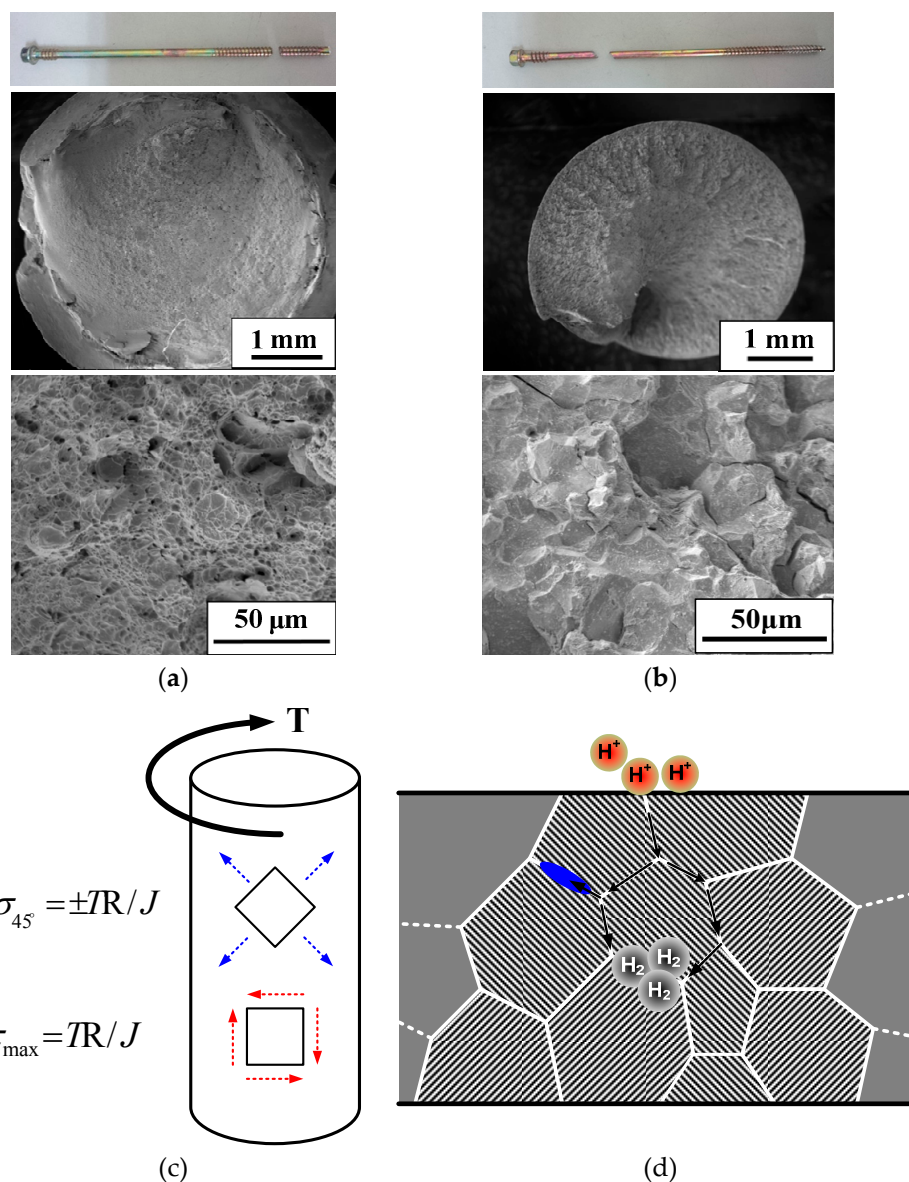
Macrostructure characteristics and fracture surfaces of (a) ductile screw and (b) brittle screw; (c) Force diagram for screw; (d) Diagram of HE mechanism.
